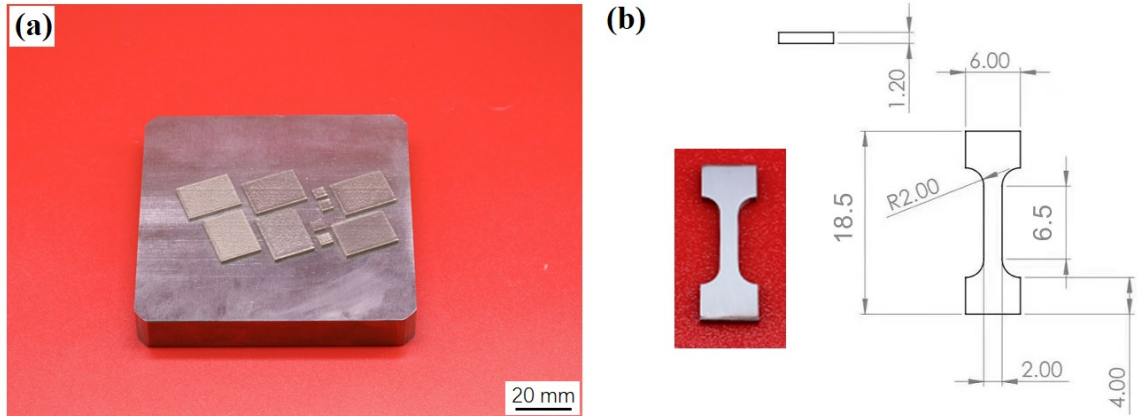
A) Samples fabricated by LPBF in an EOS M290 printer. B) Specimen dimensions (in mm) and example tensile specimen cut from rectangular prints by wire EDM.
